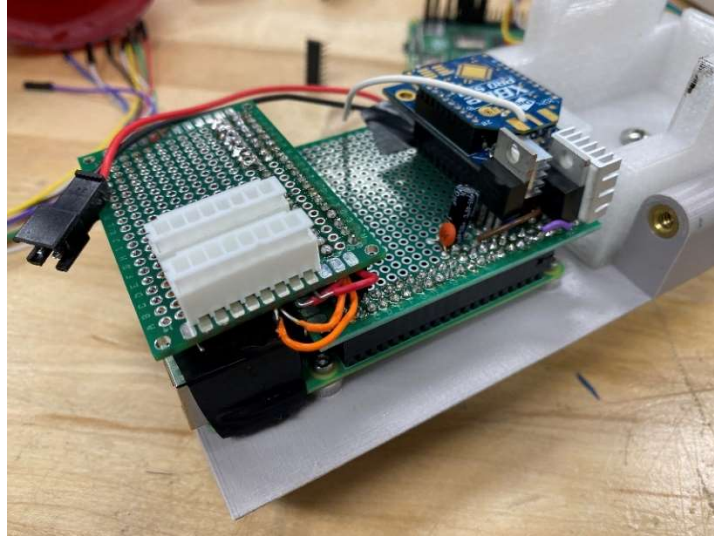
Perforated Board Mounted to the Raspberry Pi 4 with Upper Board Attached
